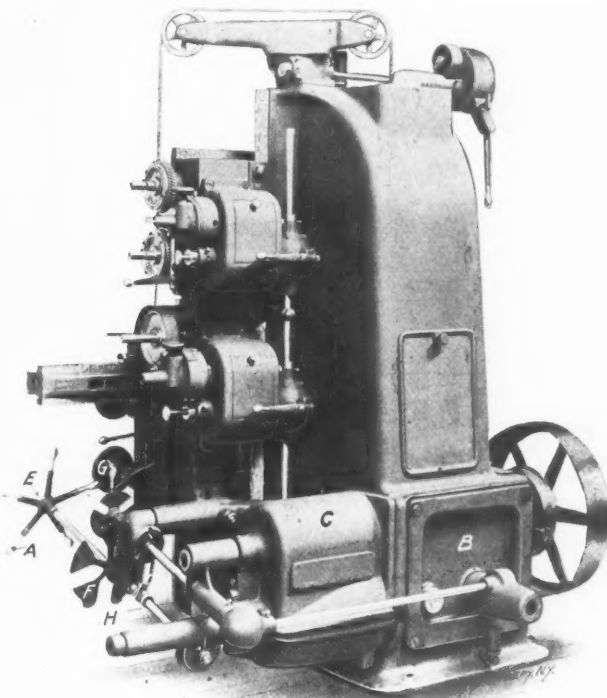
Rear View of Vertical Turret Lathe, showing Spindle Speed Changing Device.
